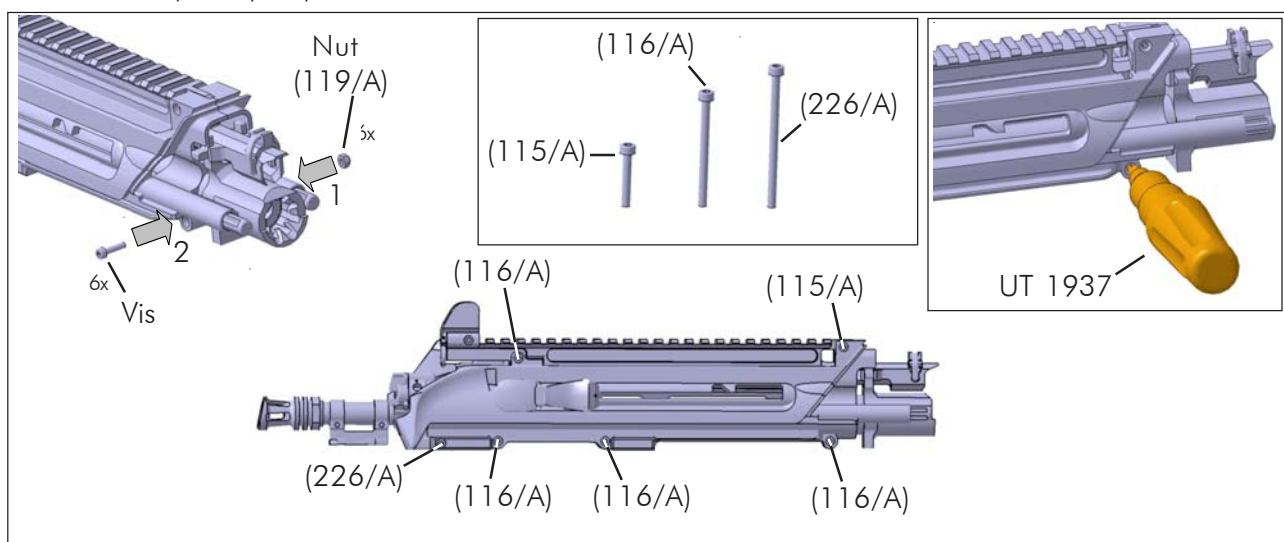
ab - Reassembly of the 6 securing screws (115/A), (116/A) and (226/A)
